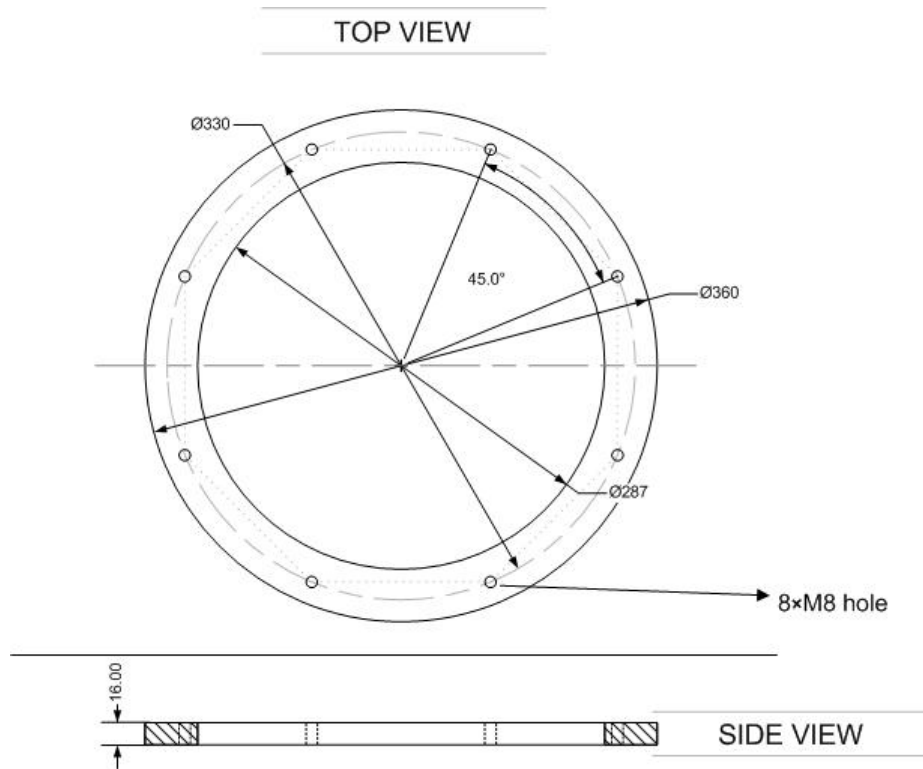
Mechanical drawing of a Perspex/stainless steel flange used to connect the column together
